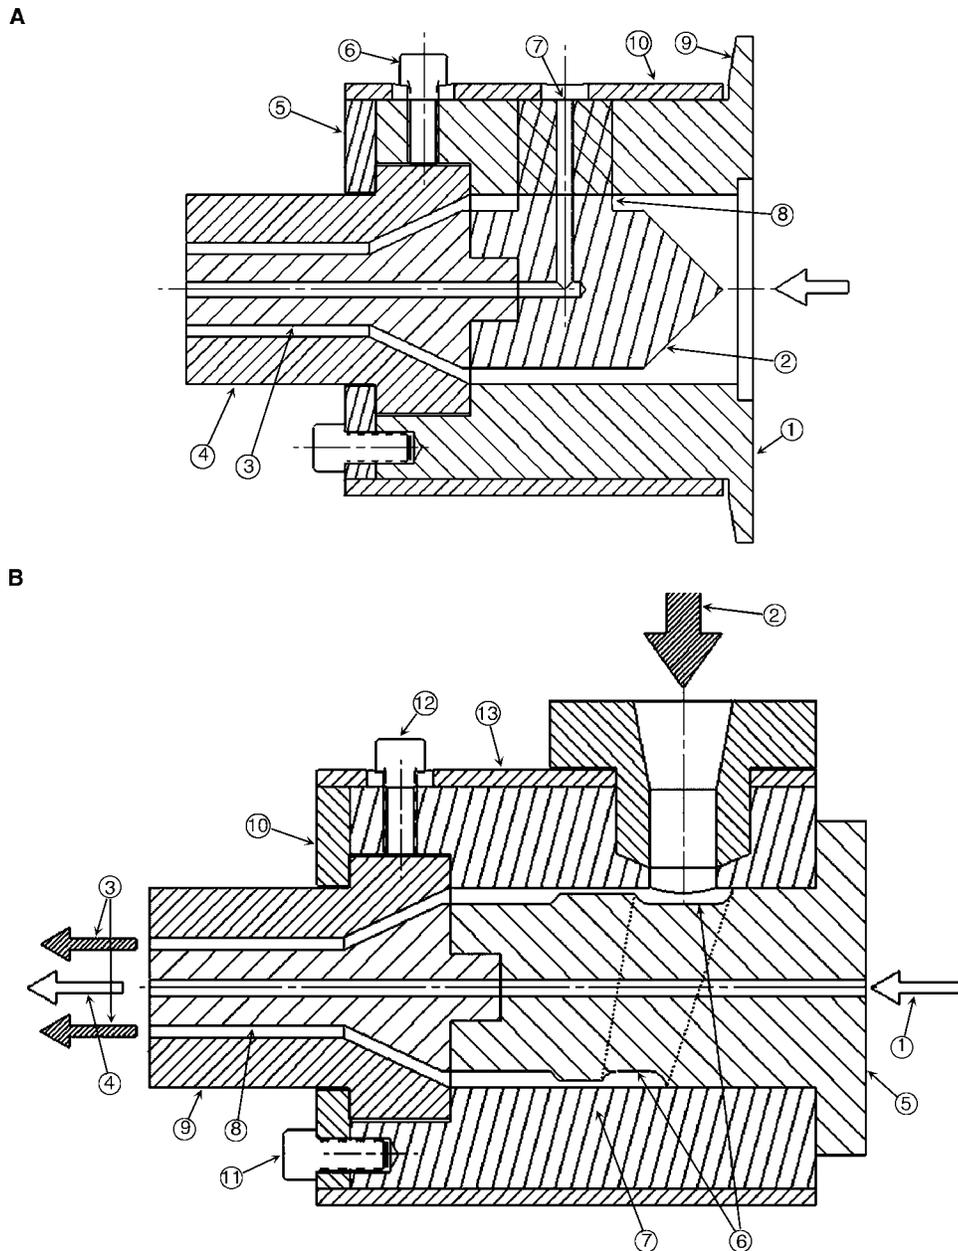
Schematic of in-line tubing die (A): (1) housing; (2) mandrel (torpedo); (3) die pin (interchangeable); (4) die land (interchangeable); (5) retaining plate; (6) die centering bolt; (7) air hole; (8) mandrel support (spider leg); (9) die flange (mount to extruder with split clamp); (10) heater band; and cross-head tubing (or wire coating) die (B): (1) air or wire conductor inlet; (2) melt inflow (side inlet); (3) melt exit (annulus); (4) air or wire conductor exit; (5) core tube; (6) flow splitter; (7) housing; (8) die pin; (9) die land; (10) retaining plate; (11) retaining ring bolt; (12) die centering bolt; (13) heater band.
